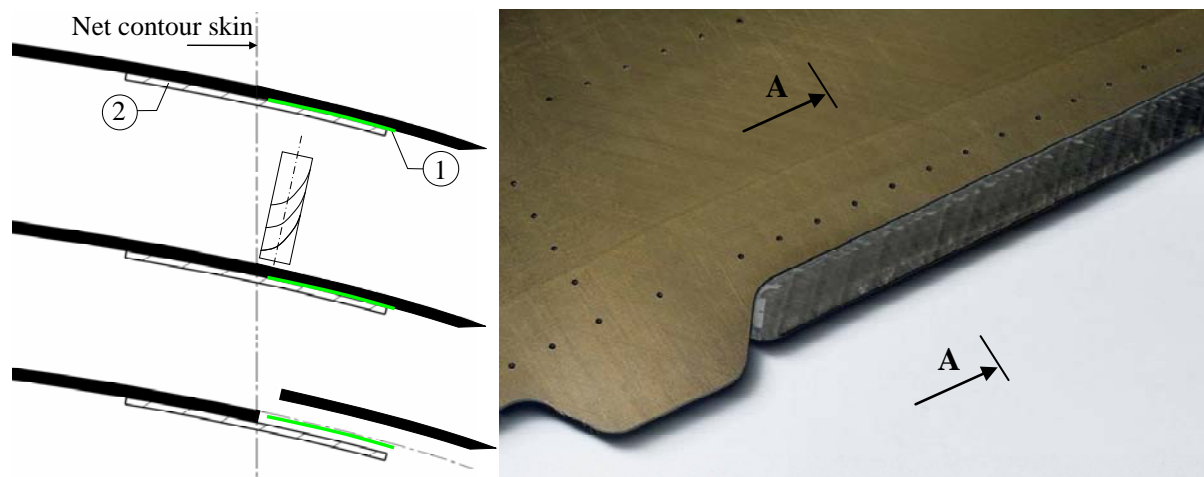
Concept for manufacturing skins with integrated doubler, 0.2mm teflon strip (1) and (2) doubler strip, and resulting machined upper skin at leading edge
